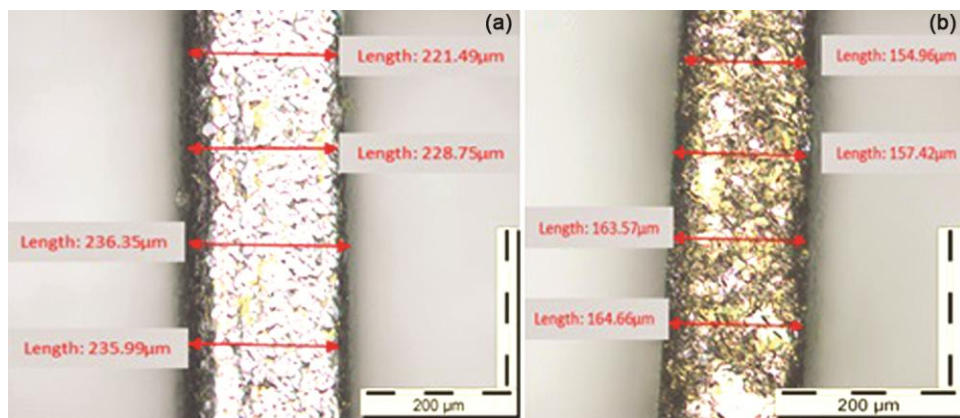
Microscopic image of wire (a) before machining and (b) after machining.
